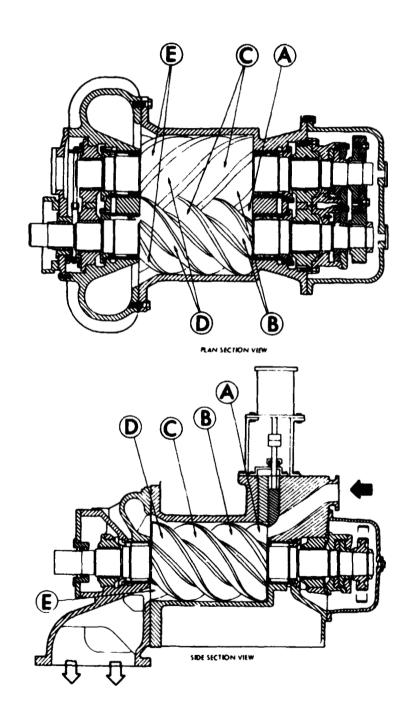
Helical Rotary Screw Expander (Courtesy HPC, Notations Added by JPL Technical Project Manager)
